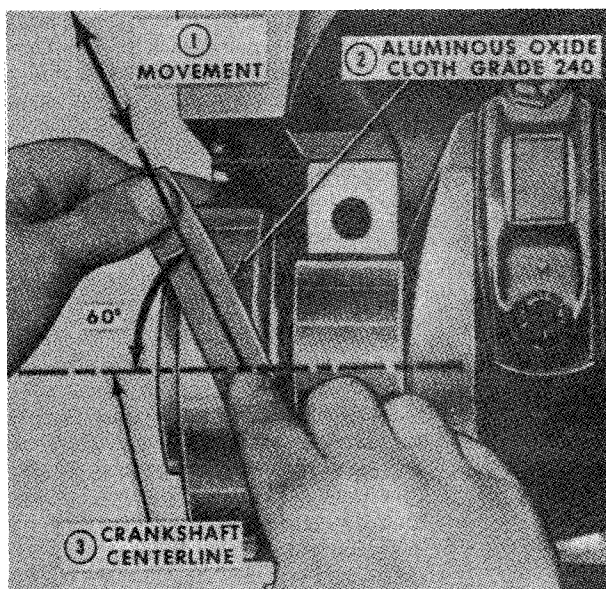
Whenever necessary to renew crankshaft rear oil seal, crankshaft sealing surface must be "scrolled" using Grade 240 aluminum oxide cloth and at angle shown. Refer to text.
